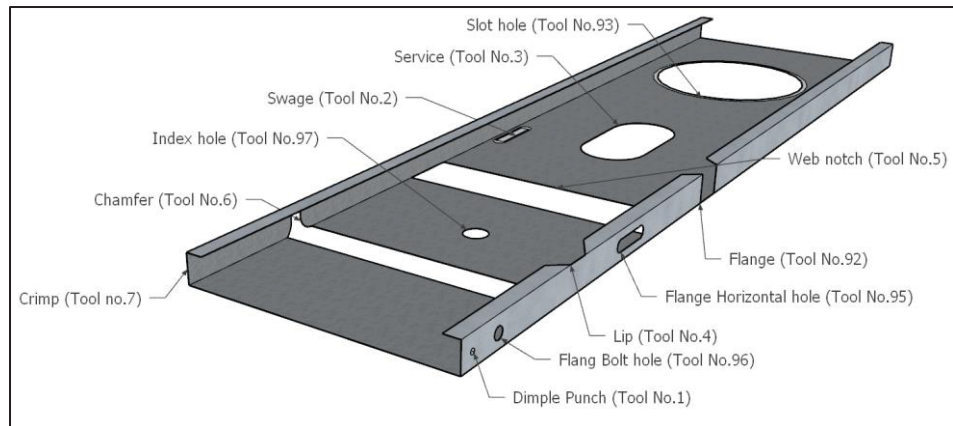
Design of operational tools in machine configuration setup (authors' work)
